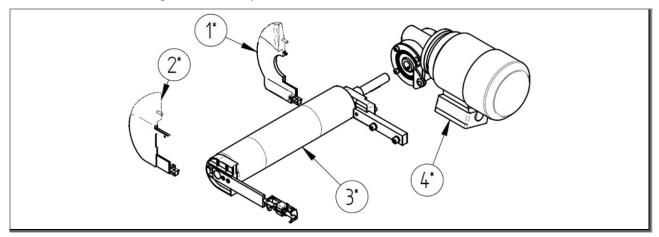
Parts list: Flange drive unit - position of drive unit 23 - ZZ.900.0150.00
